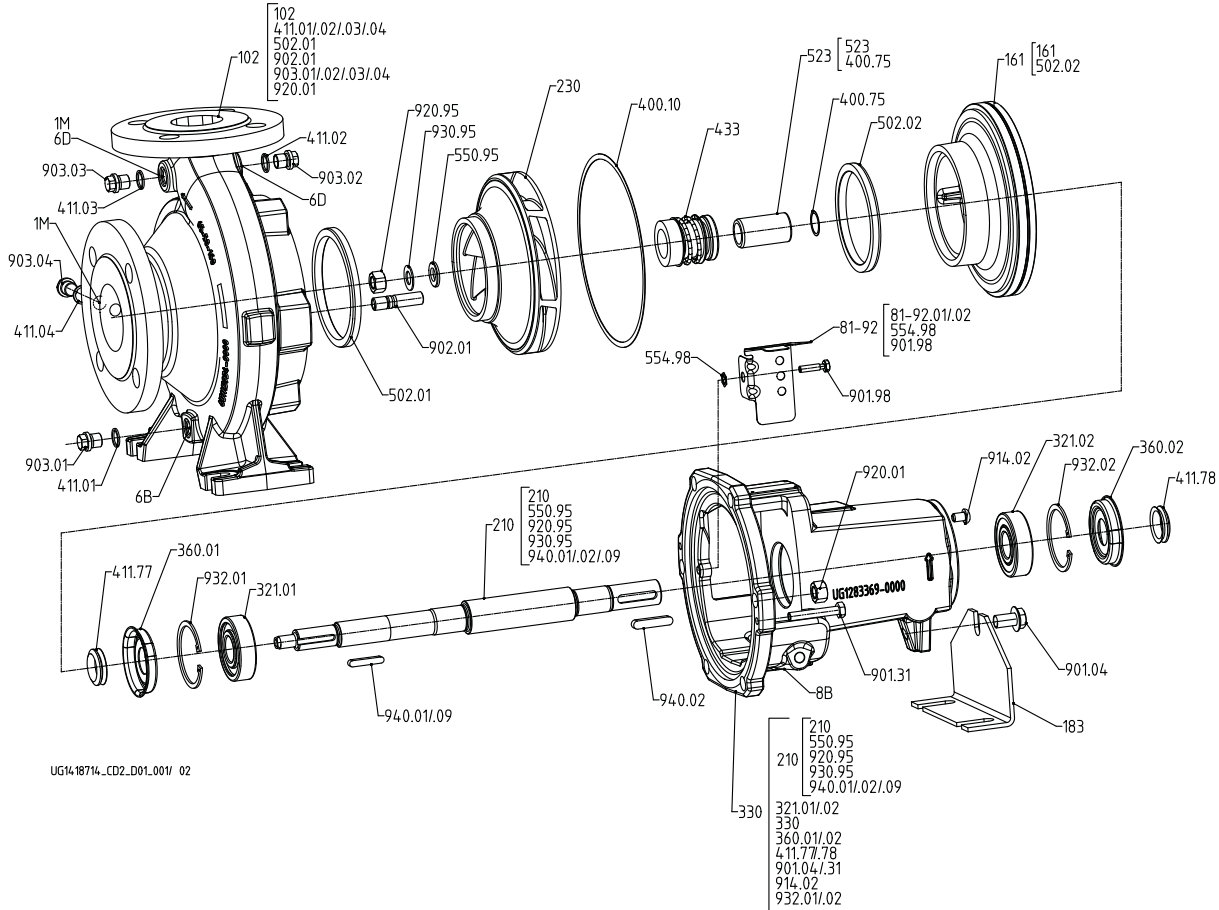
Version with standardised mechanical seal and clamped casing cover
